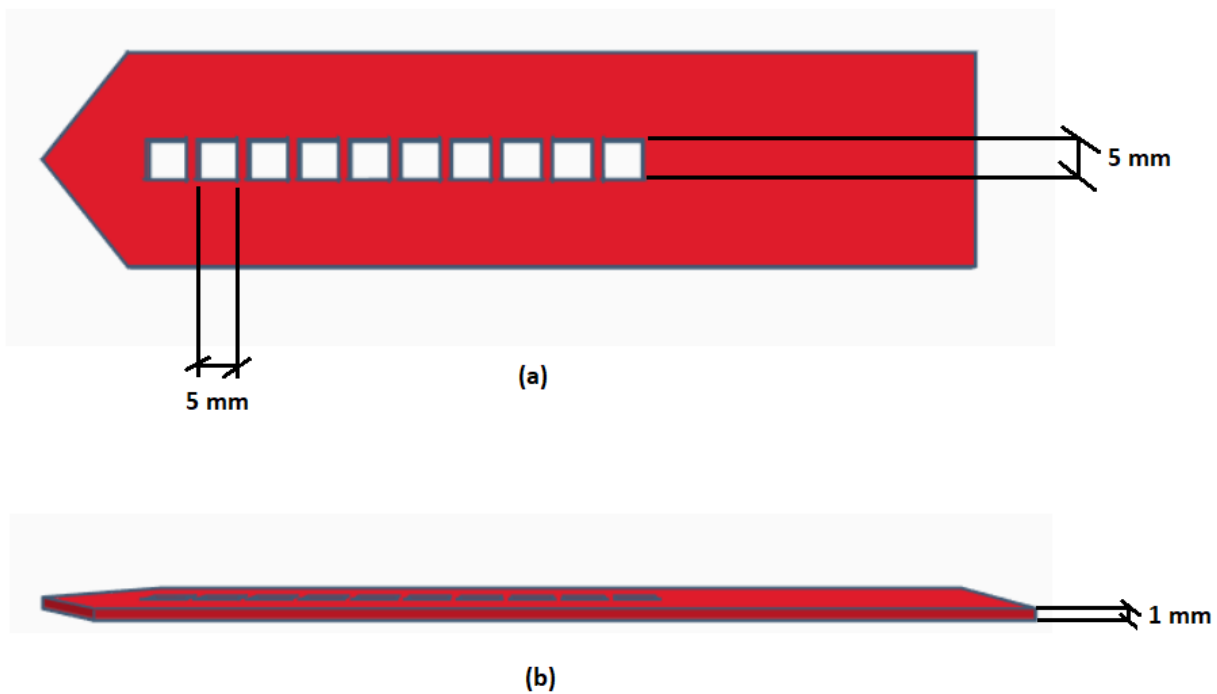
Teflon mold for hydrogel preparation (a) Top view of the mold (b) Front view of the mold
